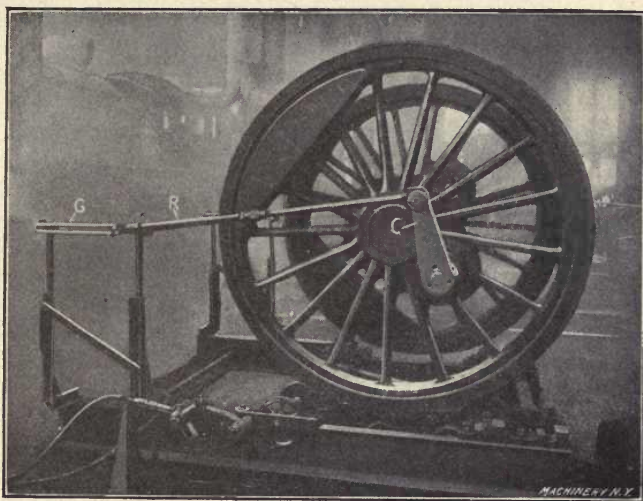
Gage for Setting Return Cranks of Walschaerts Valve Gear
